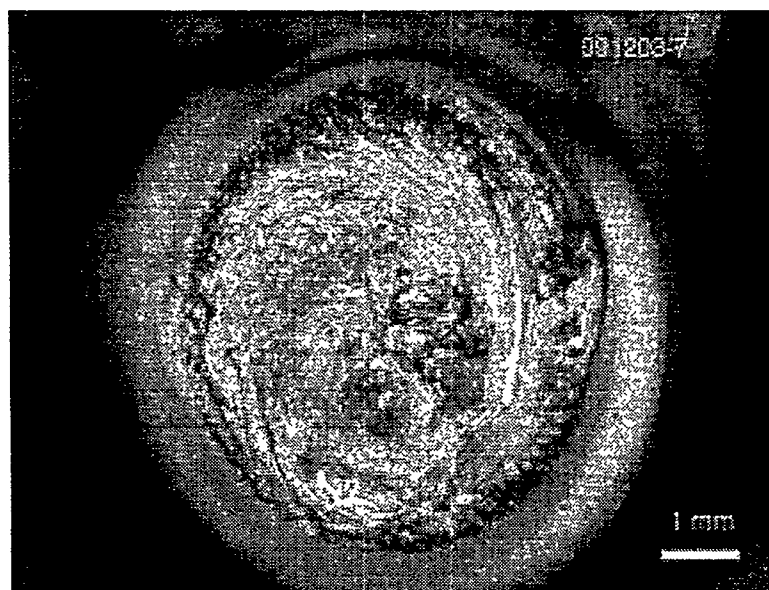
Fractography of torque tested weld (Test No. 991203-7)
